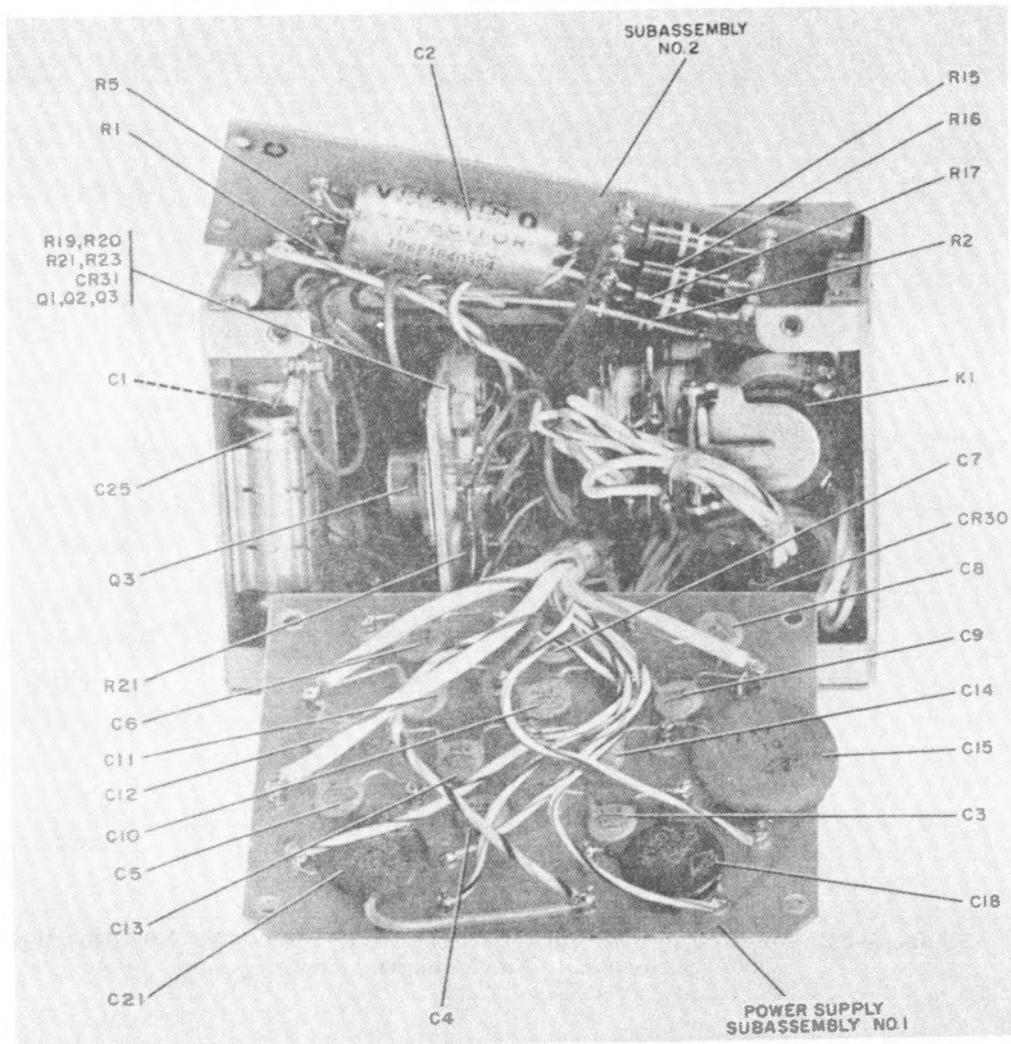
Power Supply PP-3518/PRC-47 (A5), Location of Major Components and Component Mounting Board Subassemblies No. 1 and No. 2, Parts Location
